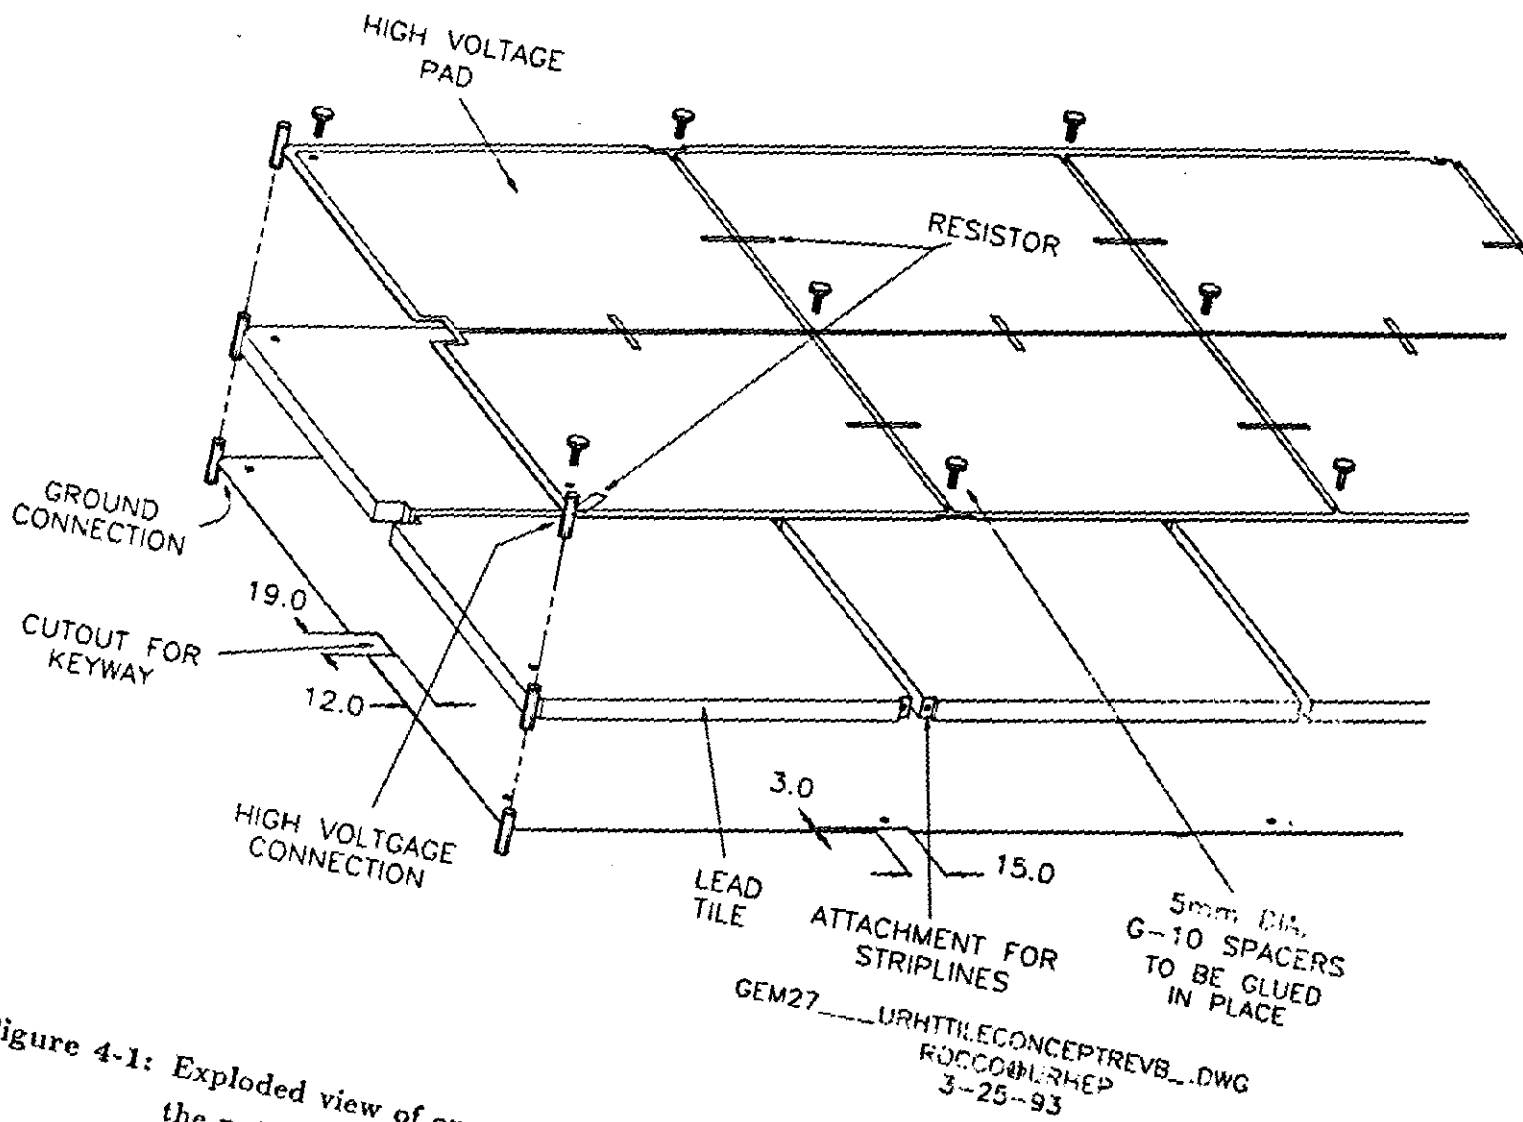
Exploded view of one end of a tile absorber layer, showing spacers, as well as the notches for cable connections and keyways for attaching the layer to the endplates
